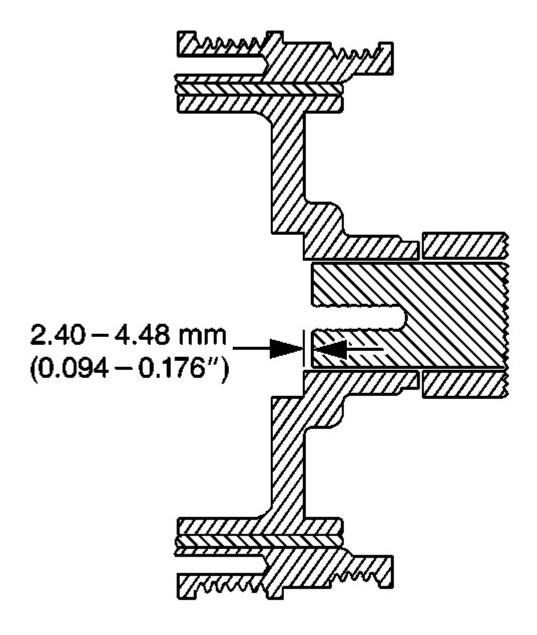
Identifying Hub To Crankshaft Distance Courtesy of GENERAL MOTORS CORP.
